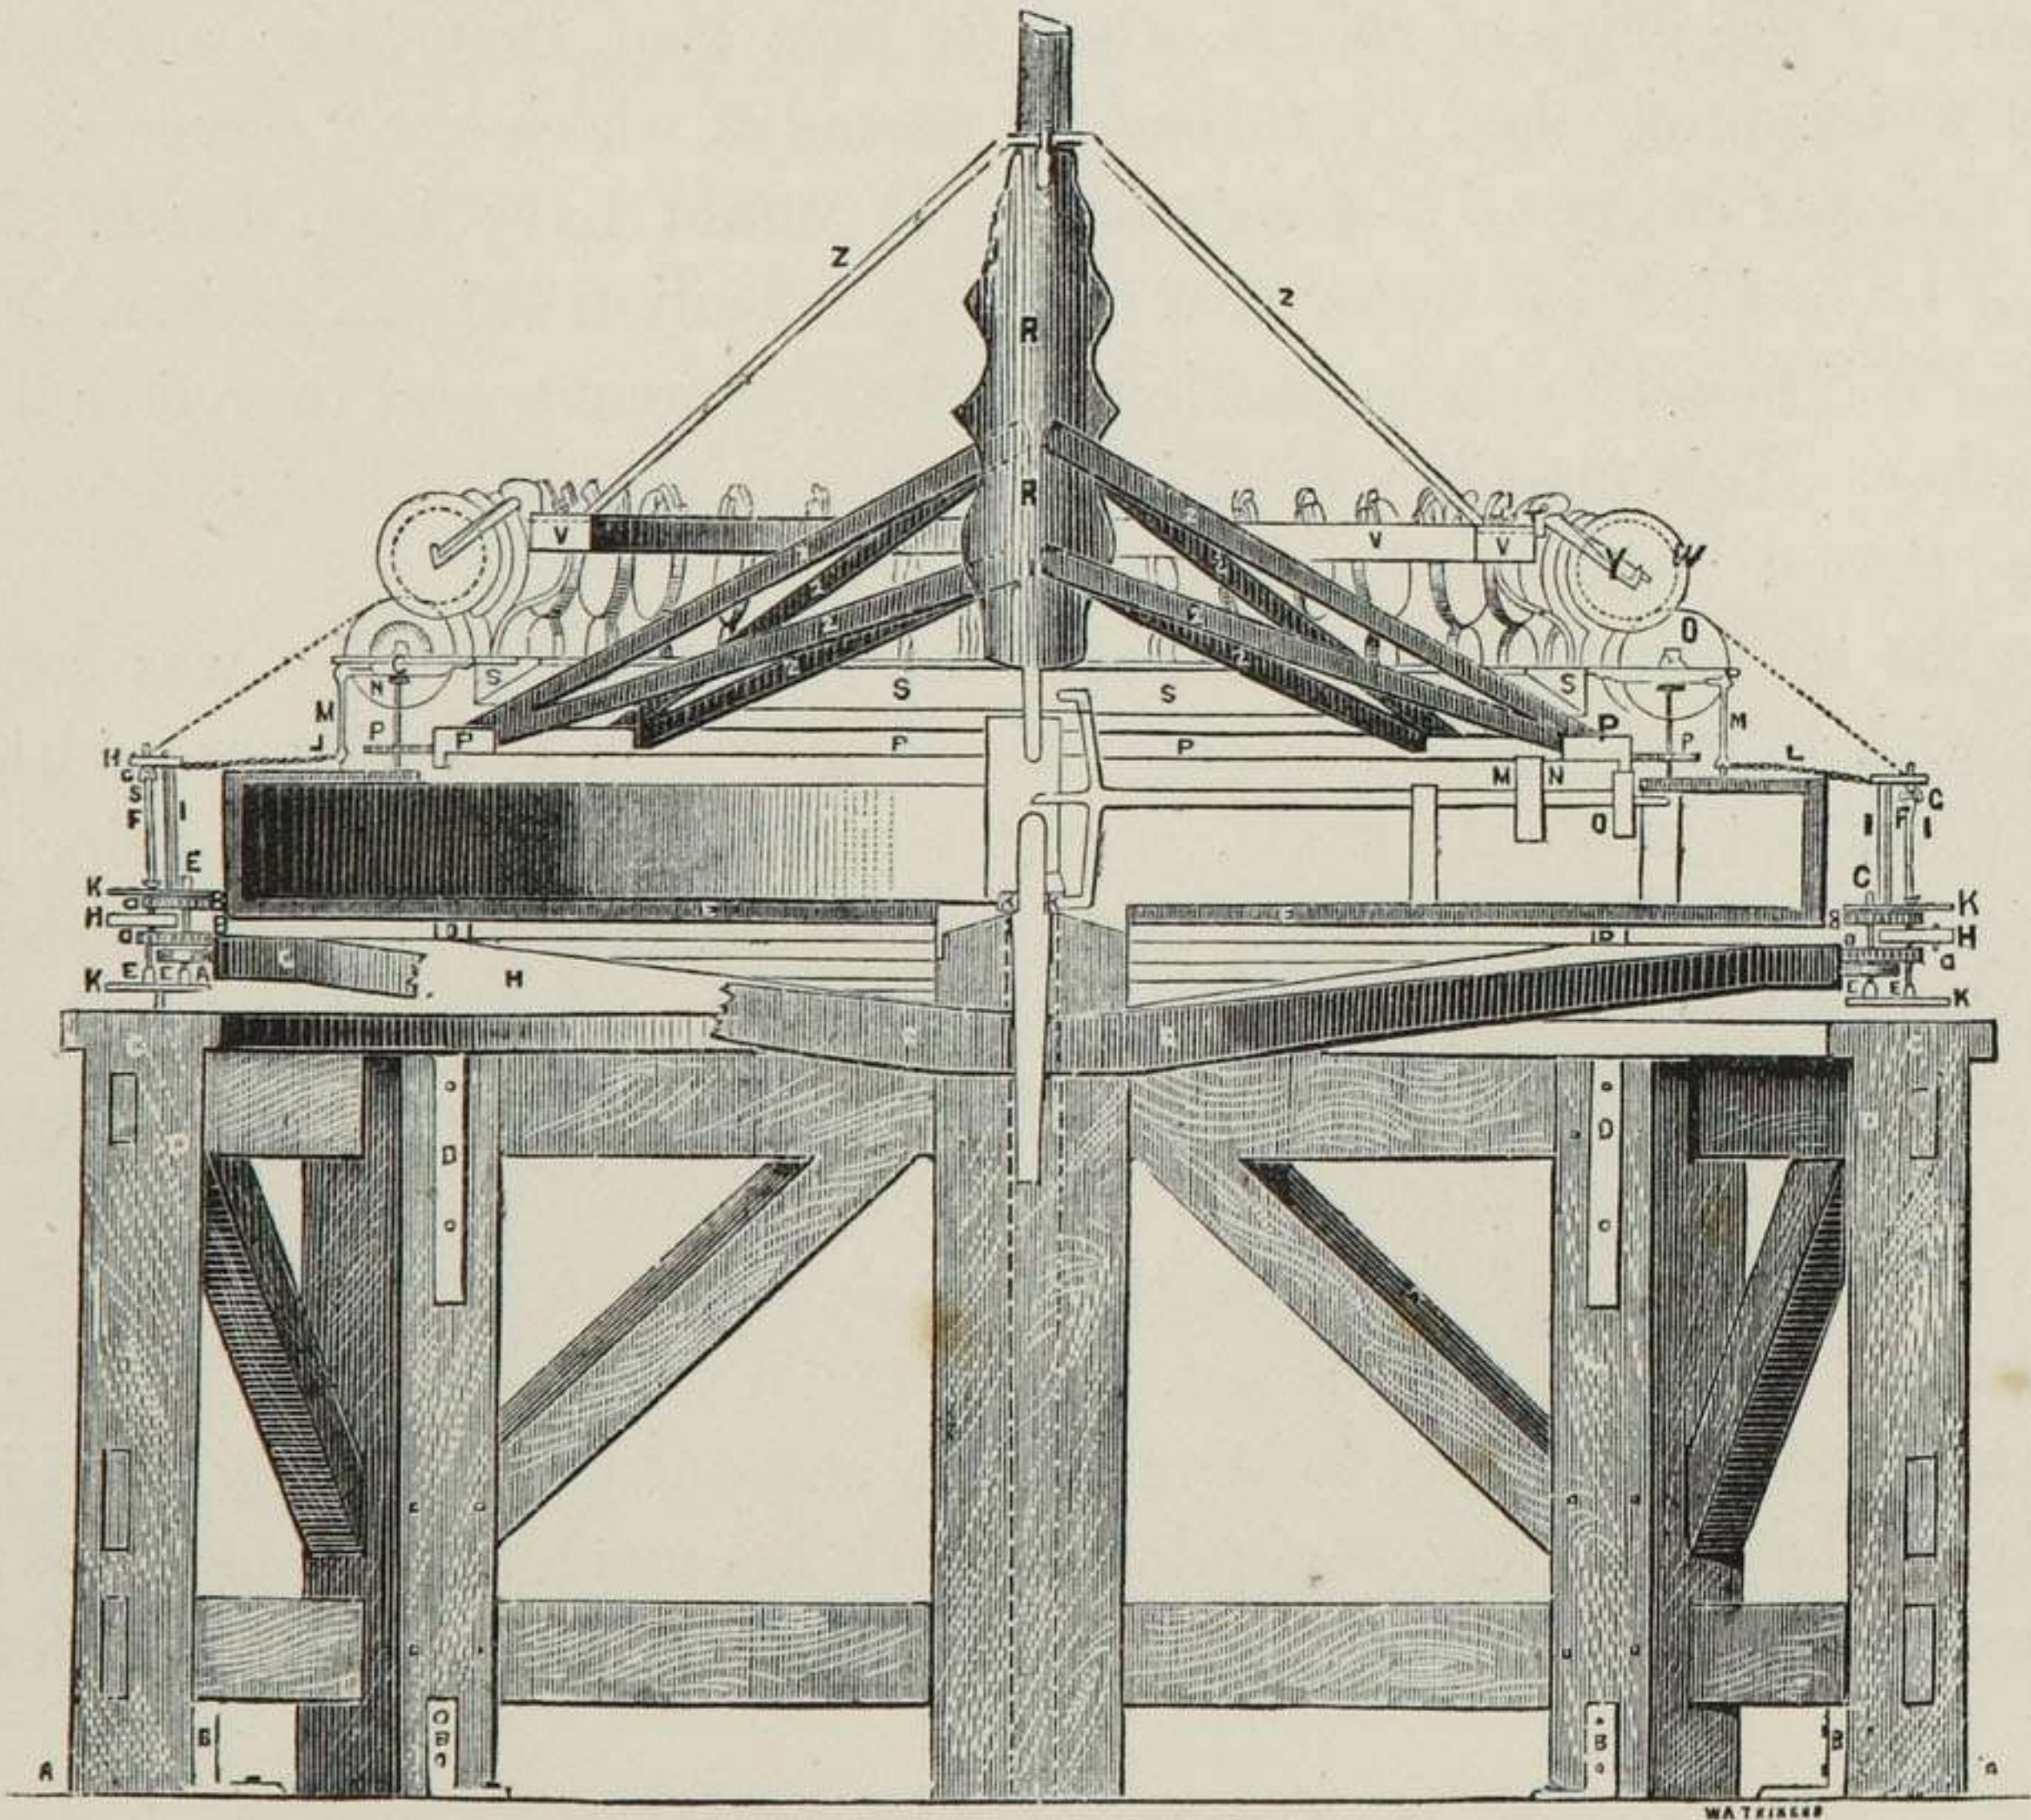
Paul's Spinning Machine. (Patent of 1758.)
